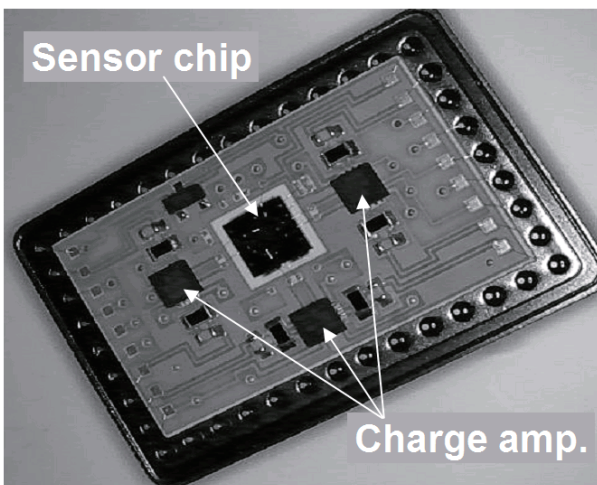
Packaged ZSZ 3-axis accelerometer with charge amplifier.
